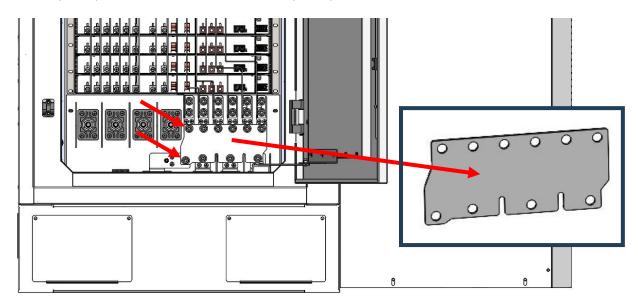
M6 and M8 socket head cap screws must be removed to remove plastic spacer plate
